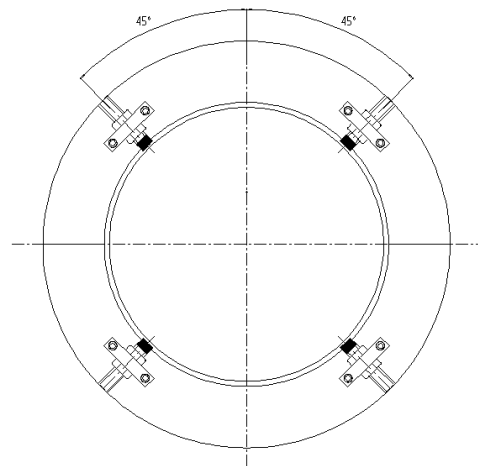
Push-Pull Test Bearing Proximity Probe Arrangement
